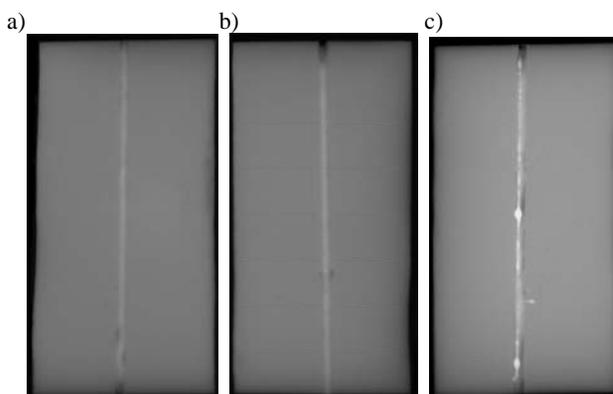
The X-ray photographs of the EB welds: a) 2N11K13H3M high cobalt maraging steel, b) N19M4T cobalt-free maraging steel, c) H11N10M2T PHSS steel
